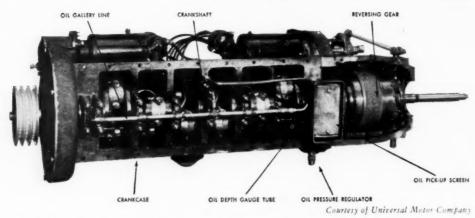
Bottom view of Universal Cruiser Six marine engine, with oil base removed, showing oil gallery lines and other parts of oil system.
